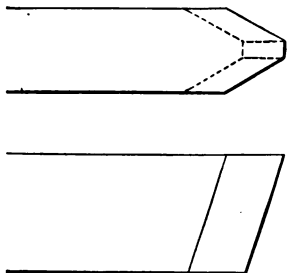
Simplest Form of Thread Tool for United States Standard Thread
